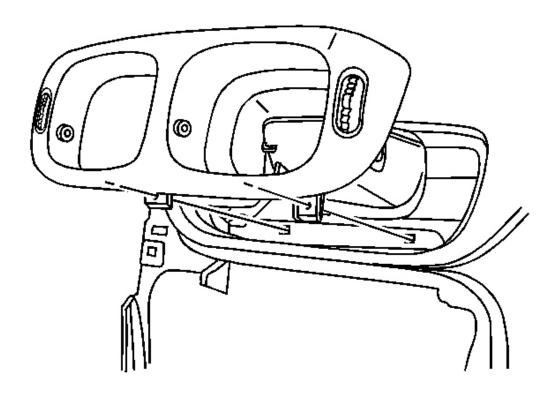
Removing/Installing Air Outlet Courtesy of GENERAL MOTORS CORP.
